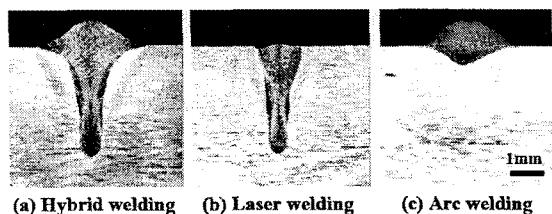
Cross sections of hybrid, laser and arc weld beads
